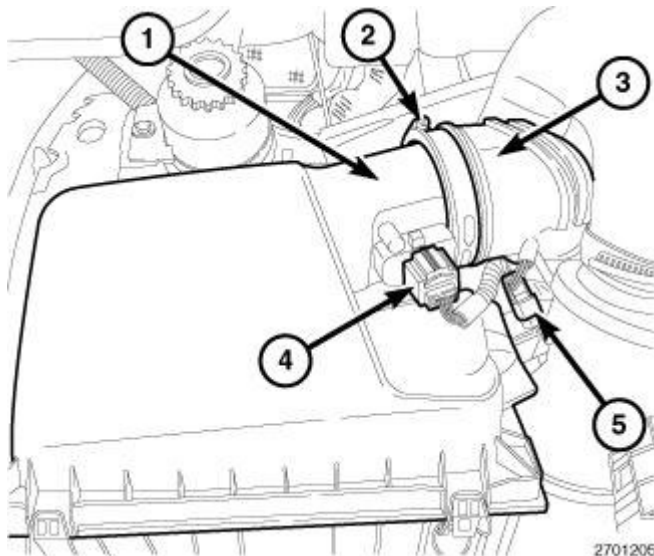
IDENTIFYING AIR CLEANER HOUSING & CLIPS
